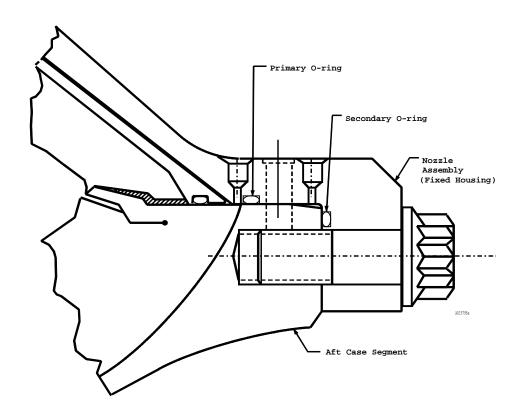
Case-to-Nozzle Joint, Primary and Secondary O-rings
